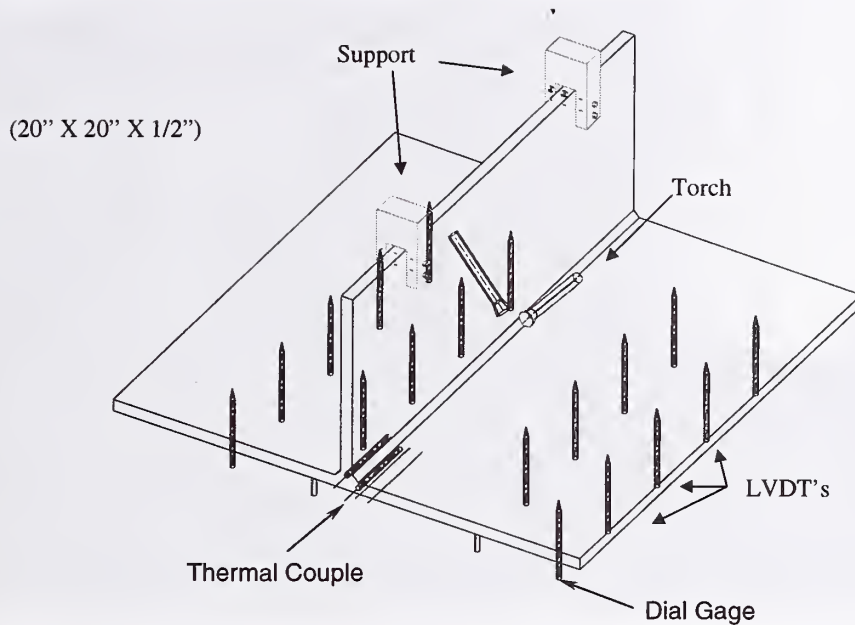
Experimental set-up of welding of stiffened panels (Tee Joints). Plate size (20x 20 in.), stiffener Height (8 in.), thickness (1/2 in.)
